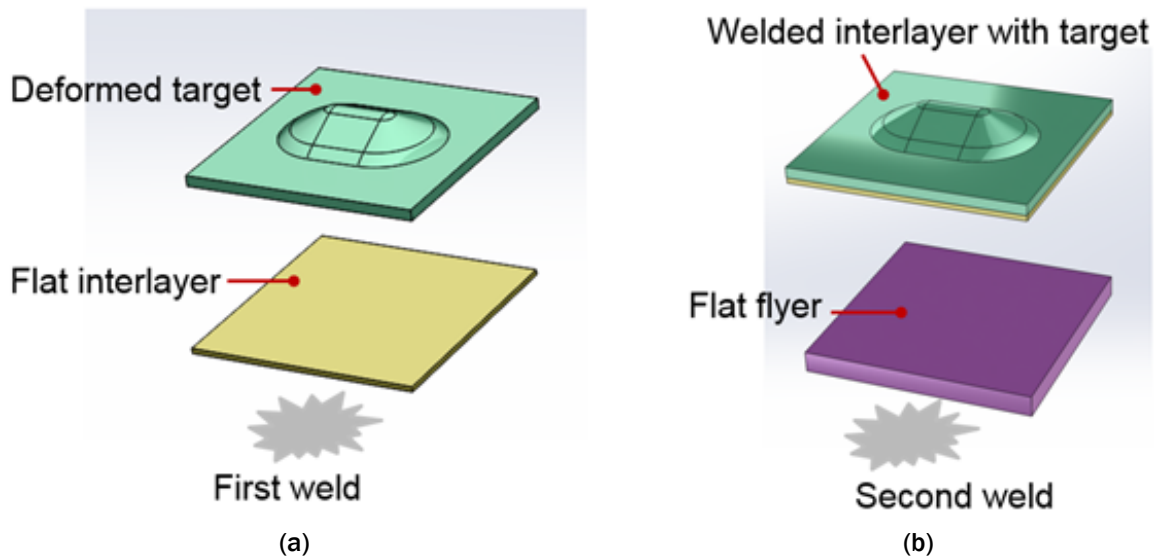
Illustrations of the two-shot VFAW showing: (a) the first shot welds the flat interlayer to the deformed target; and (b) the second shot welds the flyer to the welded flyer-target stack-up.
